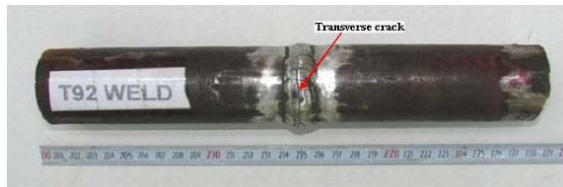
Visual inspection of failed weld specimen after subjected to thermal fatigue.
